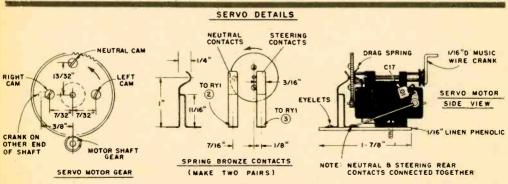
Servo motor comes equipped with plastic gear (left) on which screws must be mounted exactly where shown. Neutral and steering contacts (center) are mounted with servo motor on separate piece of phenolic board. Dimensions are critical and must be observed carefully. Music-wire crank is 7/16 x ¼ inch.
